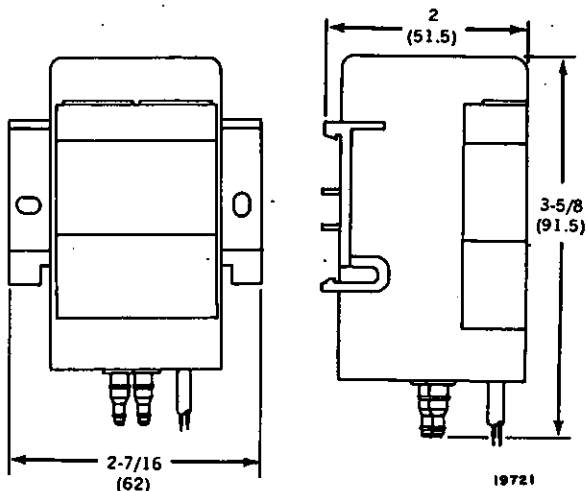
RP7517 E/P Transducer Approximate Dimensions in Inches (Millimeters).
